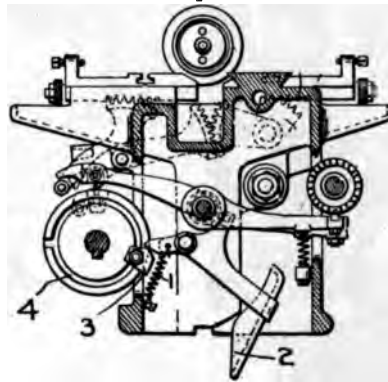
CROSS SLIDE OPERATING MECHANISM AND DEFLECTOR TO SEPARATE WORK AND CHIPS. BROWN & SHARPE MFG. CO.
